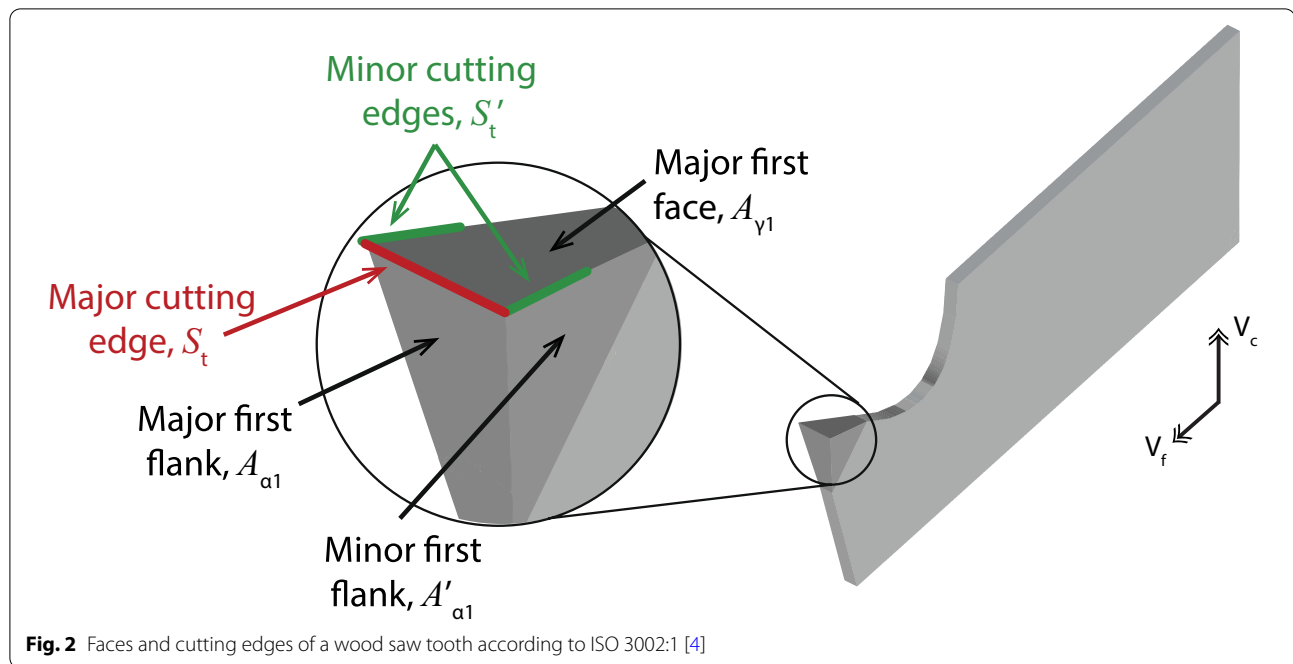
Faces and cutting edges of a wood saw tooth according to ISO 3002:1 [4]
